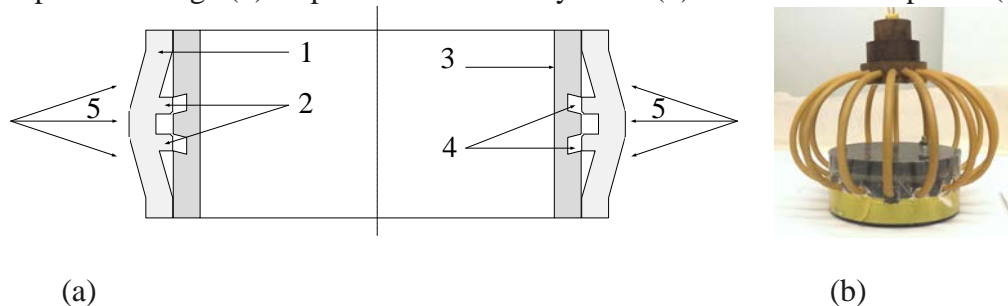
The cylinders joining according to the dovetail scheme (a) and a photograph of the assembly with 16-point initiation scheme.
